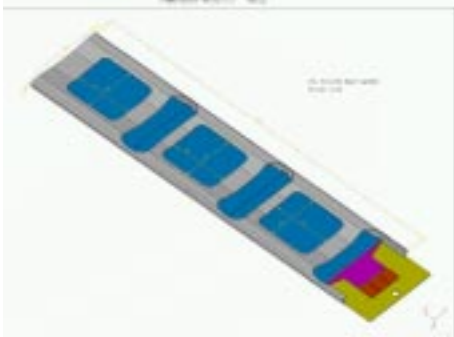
The ISL ladder. The holes on the body of the support are for the assembly jig towers and for the microbonding machine. The hybrid is glued and microbonded on one edge of the ladder.
